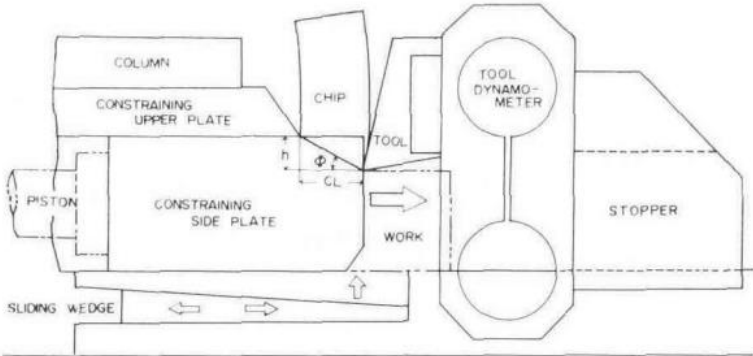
2D scheme of the orthogonal cutting machine used by Atknins *et al.* (1974)
